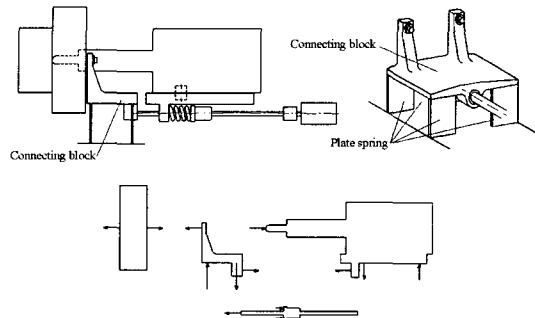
Nozzle contact mechanism preventing stationary platen bending
